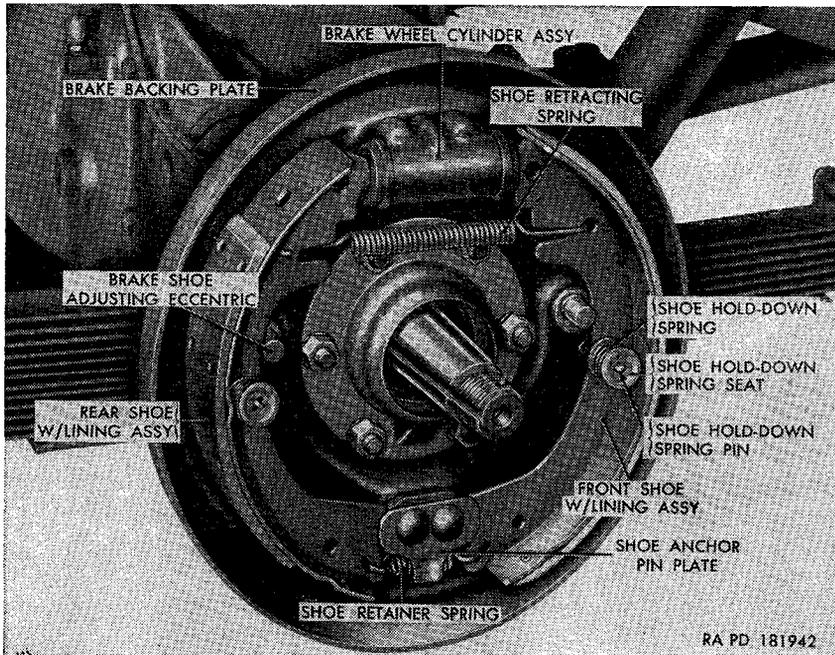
Rear servive brake assembly—wheel, hub and drum removed.
